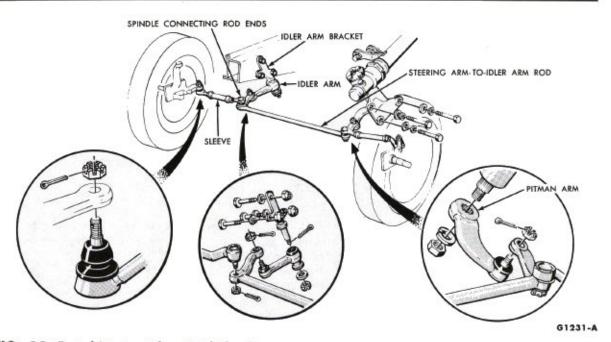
Typical Steering Linkage 8 Cylinder Shown
